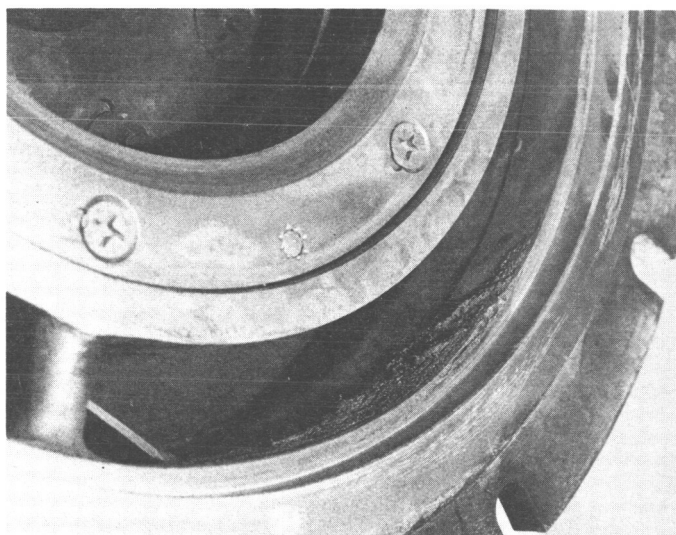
Accumulated mass-transfer products on exhaust housing
